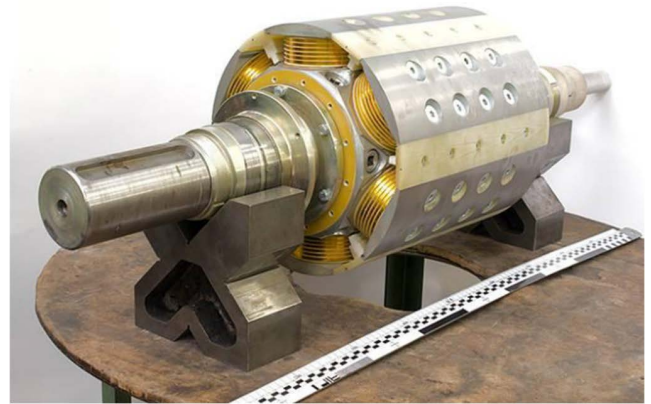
General view of a superconducting rotor with HTS coils, part of a 200 kW HTS motor [189].
